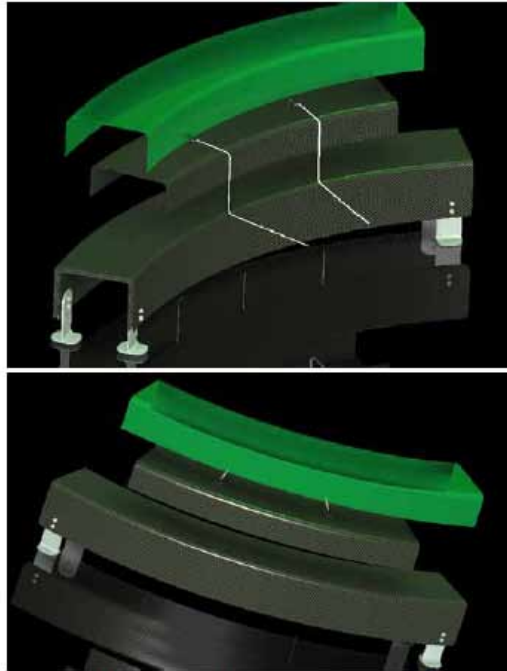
Male infusion tool, C-type CFRP stiffener, resin infusion mesh
